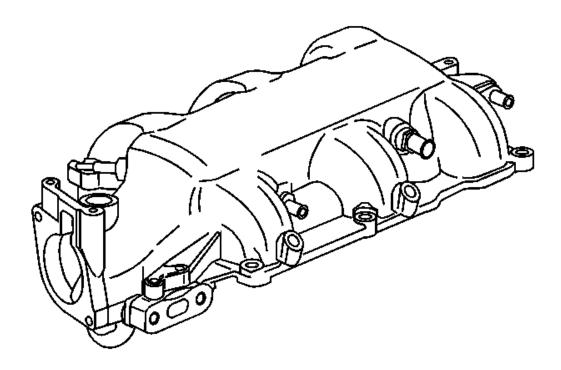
Removing Throttle Body Courtesy of GENERAL MOTORS CORP.
